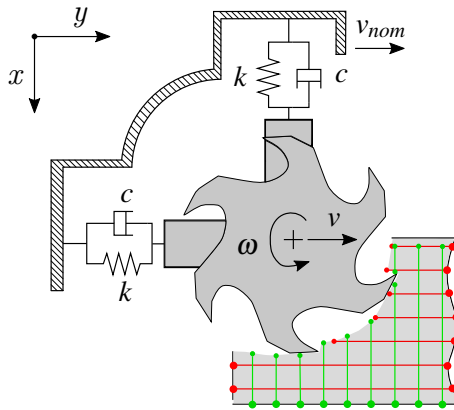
Simplified system, consisting of a tool attached, through spring-damper pairs, to a support moving along y direction and machining a workpiece in half-immersion.
